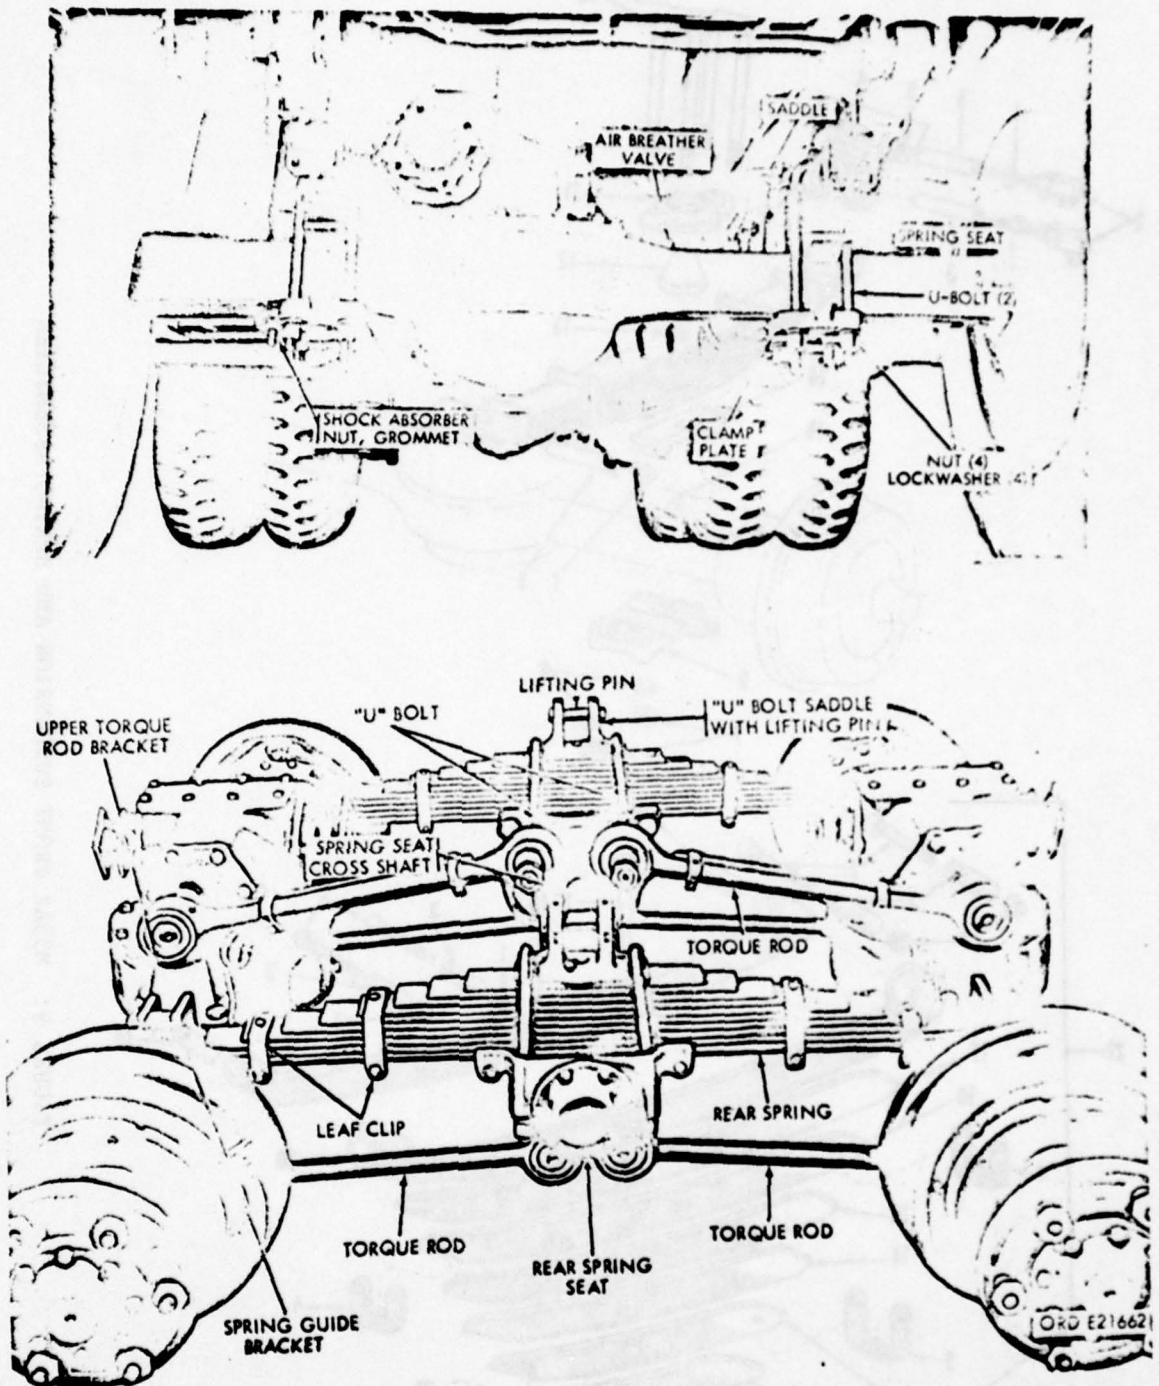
M35A2 FRONT AXLE INSTALLED (TOP) AND REAR SPRING AND TORQUE RODS (BOTTOM)
